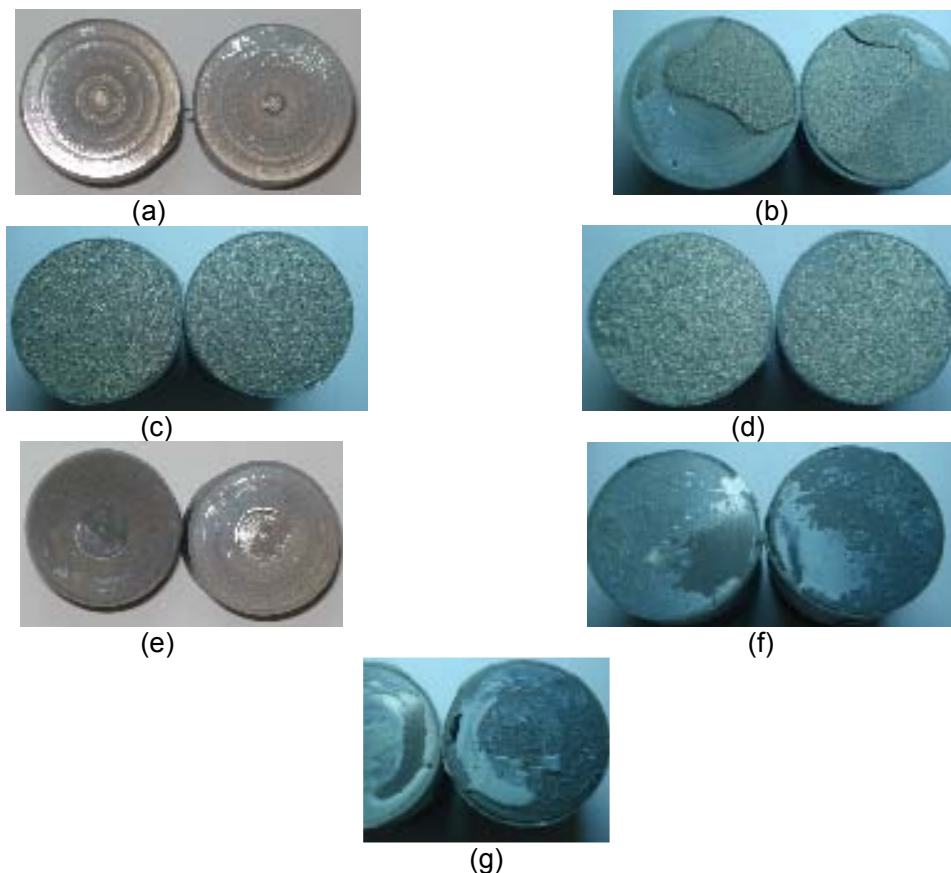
Fracture surface and macrographic aspects of the specimens' surfaces (a) without spraying and sprayed with (b) STELLIT 6 PM SD 38 EF (c) 97 MXC (d) 140 MXC (e) 1342 VM (f) 1350 VM (g) 8812.
